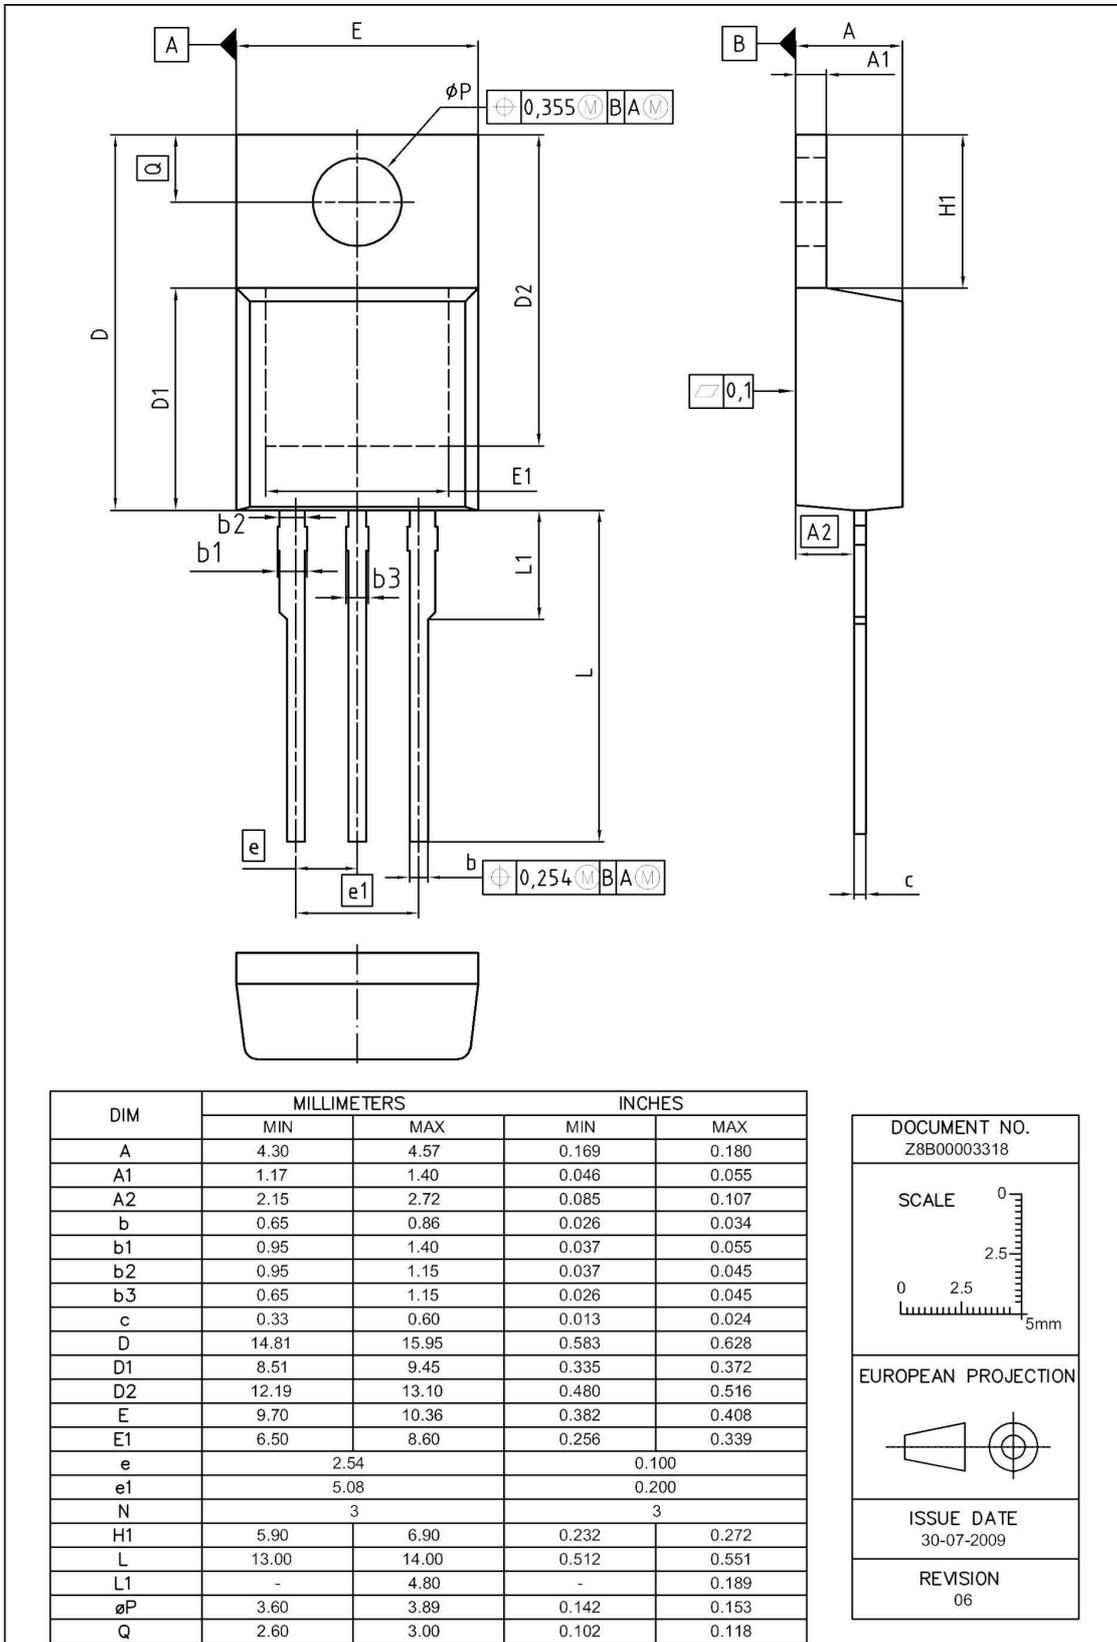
Outline PG-TO 220, dimensions in mm/inches
